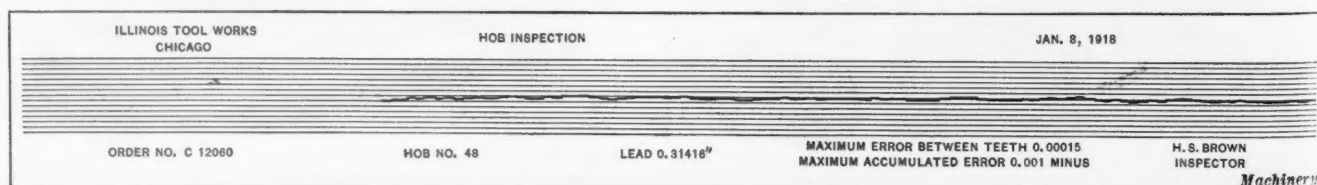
Record of Magnitude of Error in Lead of Hob Thread tested on Gaging Machine shown in Figs. 10 and 11
